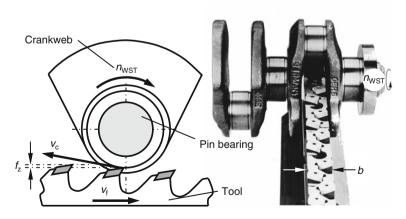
External cylindrical broaching with a reciprocating tool
